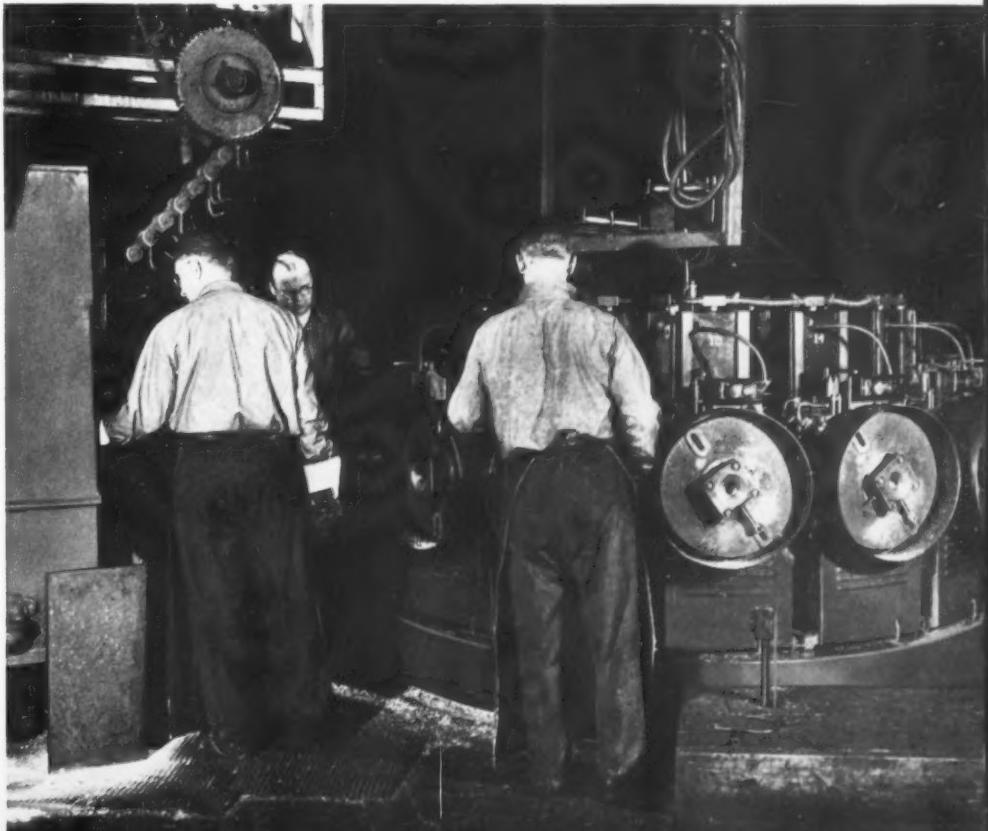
The Knuckle-pin Holes and the Bracket Spindles of Steering-knuckle Arm Supports are Completely Machined in One Pass around This Special Machine
